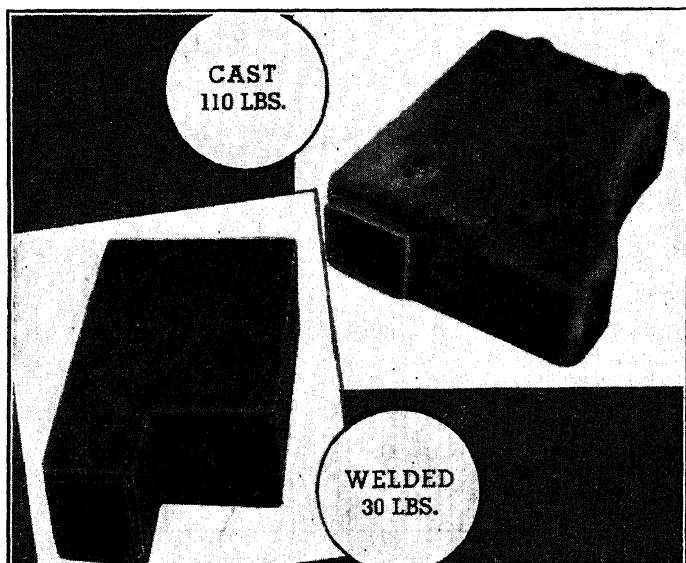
Redesign of this sand box for a mining locomotive cut weight almost 73%. This changeover is typical of many of this equipment wherein reductions in dead weight mean lower haulage costs. The welded design costs 60% less than the cast iron.
